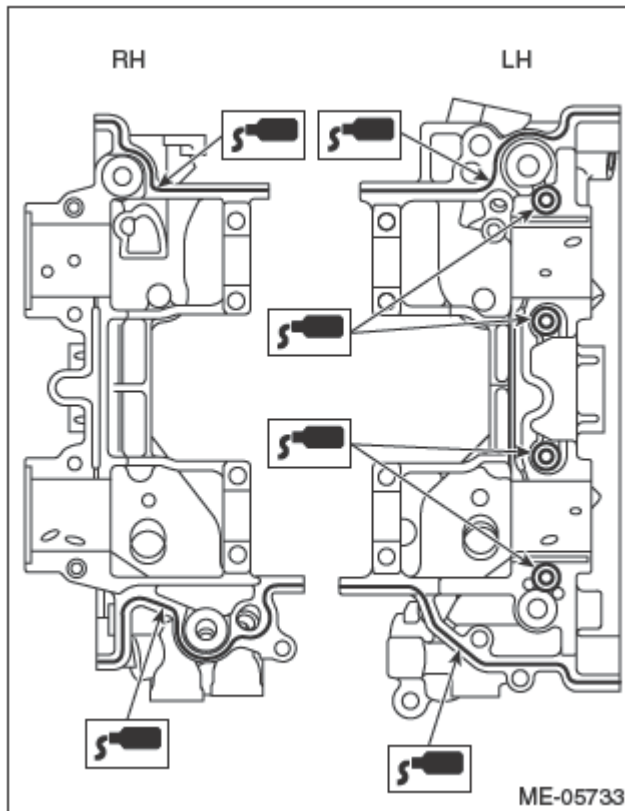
Identifying Camshaft Journals Engine Oil Applying Area
